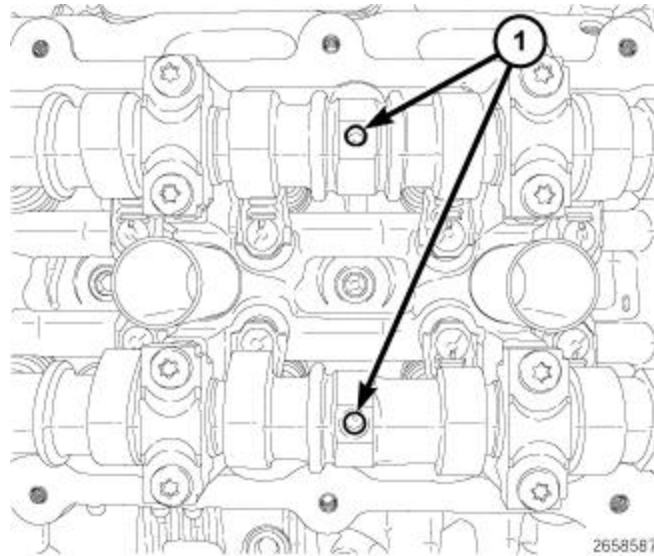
Positioning Camshaft Alignment Holes Vertically
